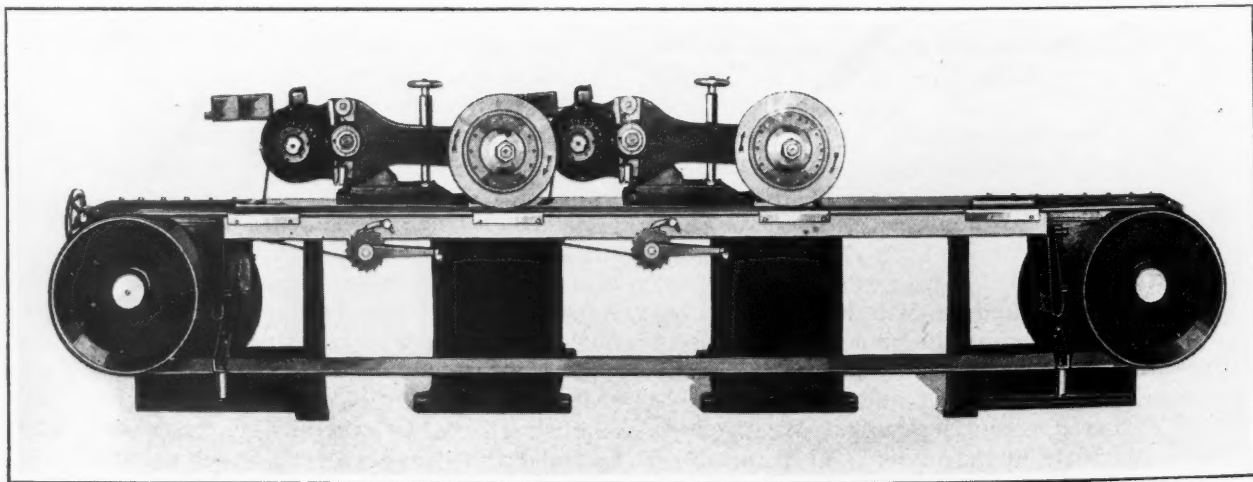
Continuous Straight-line Polishing Machine Equipped with Two Wheels
